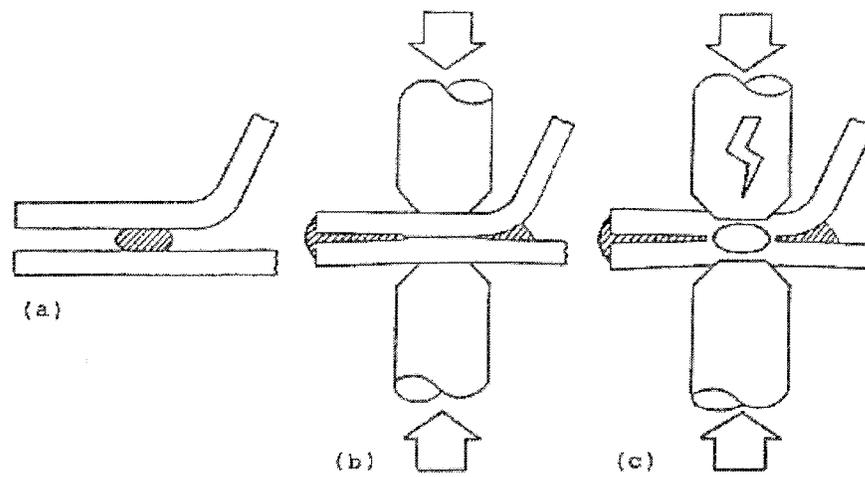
Schematic presentation of the weldbonding process: a) bead of paste adhesive applied and joint closed, b) electrode force applied, which displaces adhesive locally enabling electrical contact, c) welding current passed, weld made and subsequently allowed to cool under pressure (Westgate 1987).
